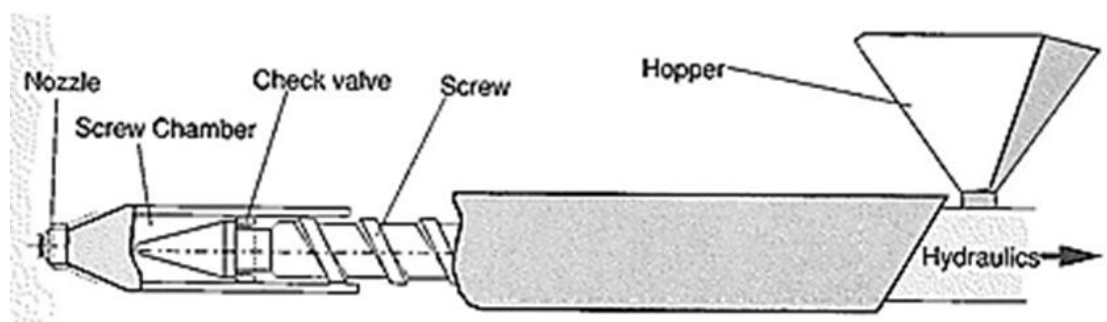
Injection Unit (Narote, et al., 2014)
